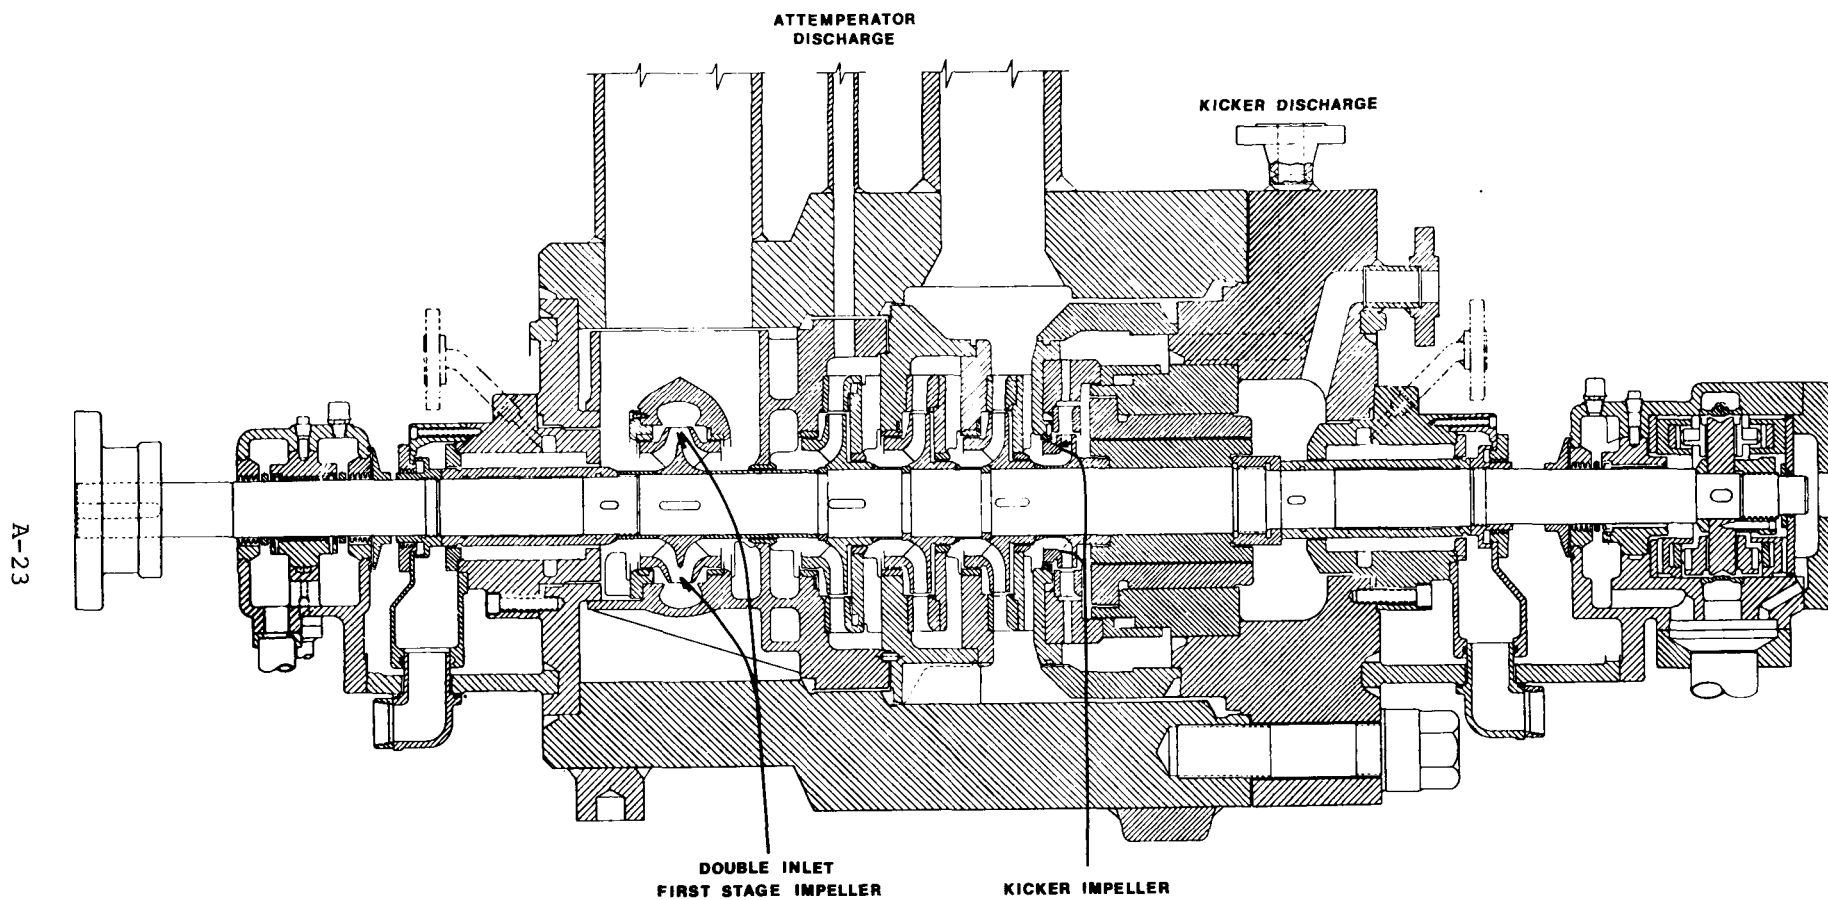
TYPICAL MULTISTAGE BOILER FEED PUMP. (IN-LINE IMPELLERS, DOUBLE SUCTION FIRST STAGE, BALANCE DRUM, SEAL TYPE NOT SHOWN-OPTIONAL, DIFFUSER TYPE)
